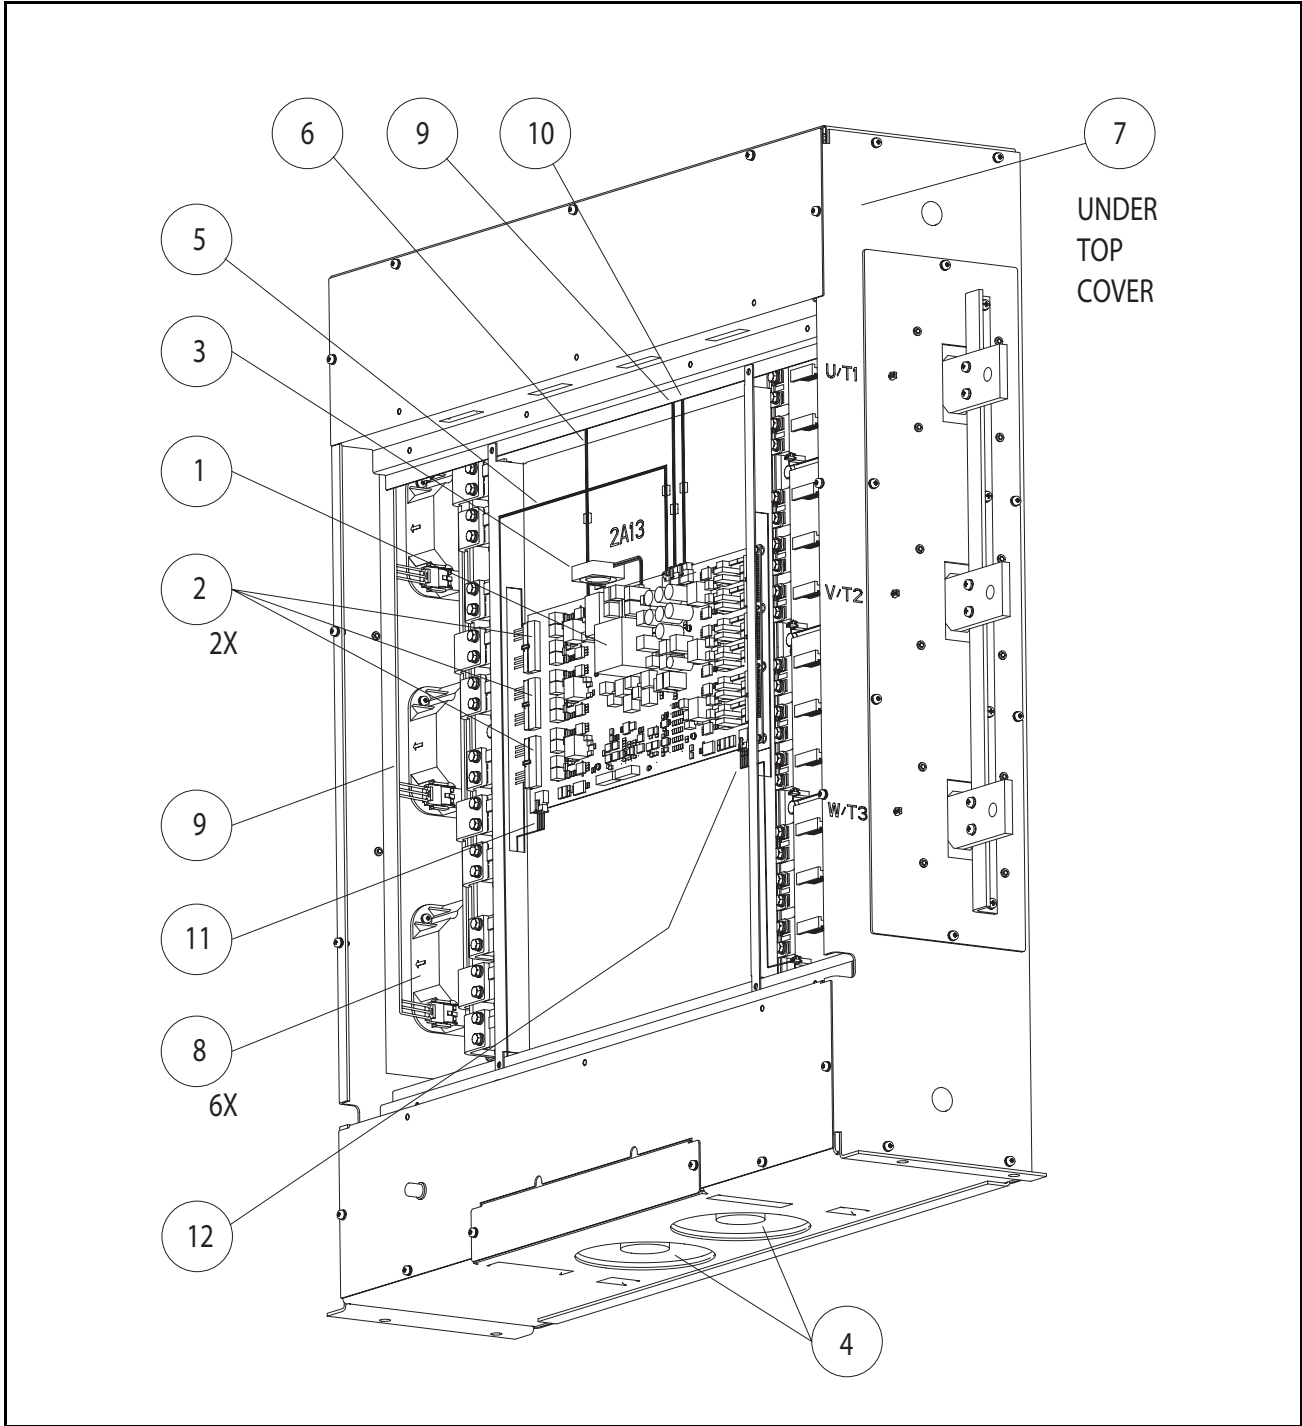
Power Module Component Locations - IO and Control Panel Removed (Frame 4)
